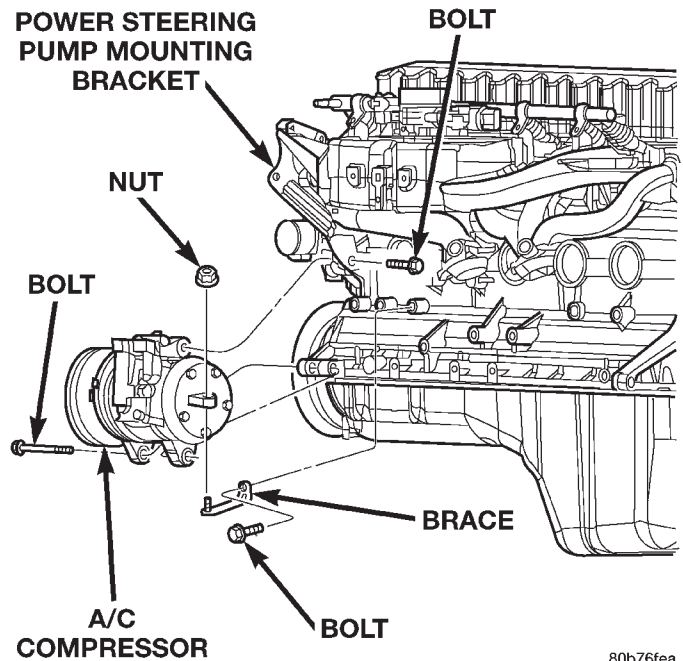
Compressor Remove/Install - 6 Cylinder Engine
